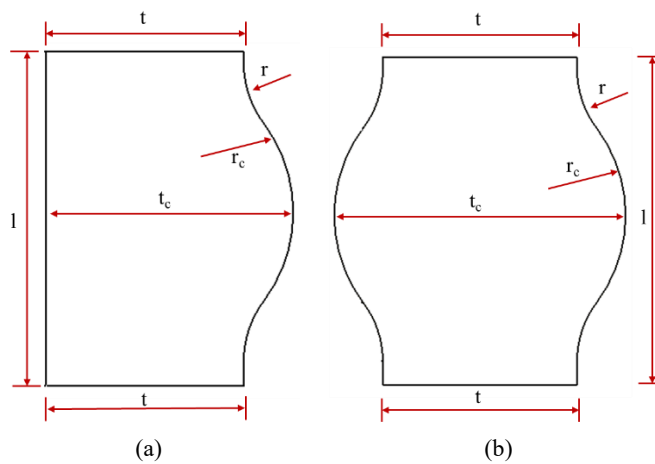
The geometric design and dimensions of corrugated thin-walled tubes with variable tube-wall thickness; a) one side corrugated and b) double side corrugated
